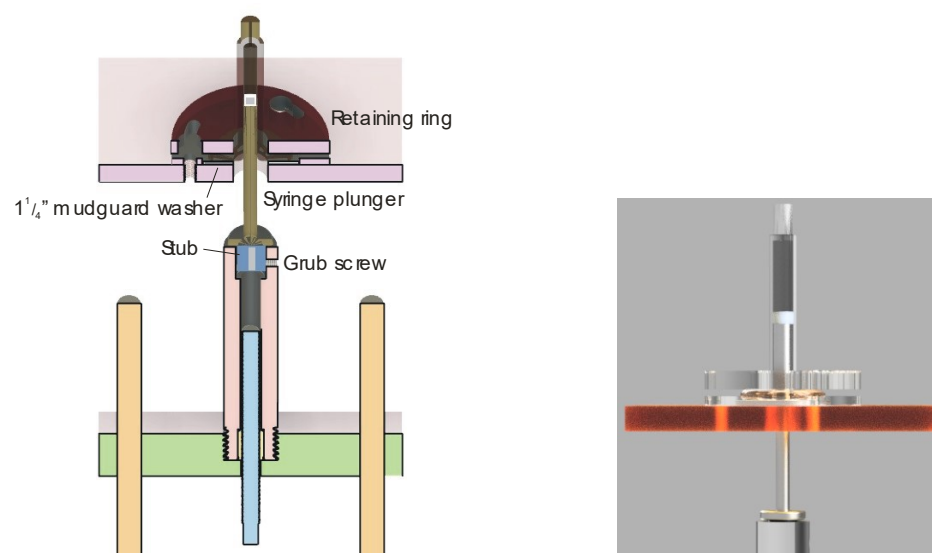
Details of the attachment of the gas-tight syringe to the stepper motor drive assembly. Cross-section view (left) and CAD rendered view (Right). The flanged part of the syringe barrel is tethered to the top layer of the assembly by clamping between a washer and retaining ring.
